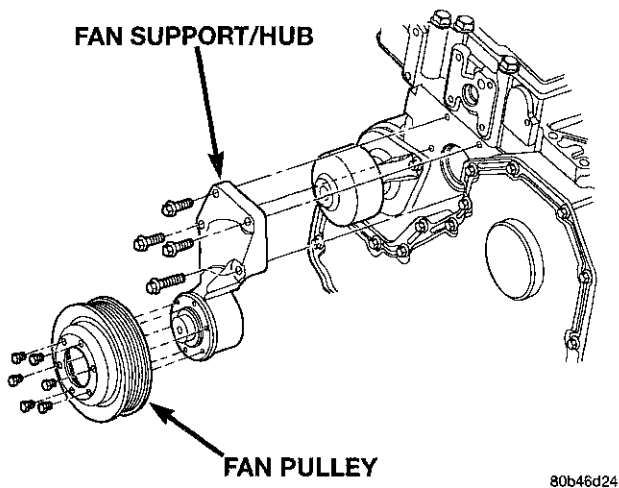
Fan Support/Hub Assembly—Removal/Installation
